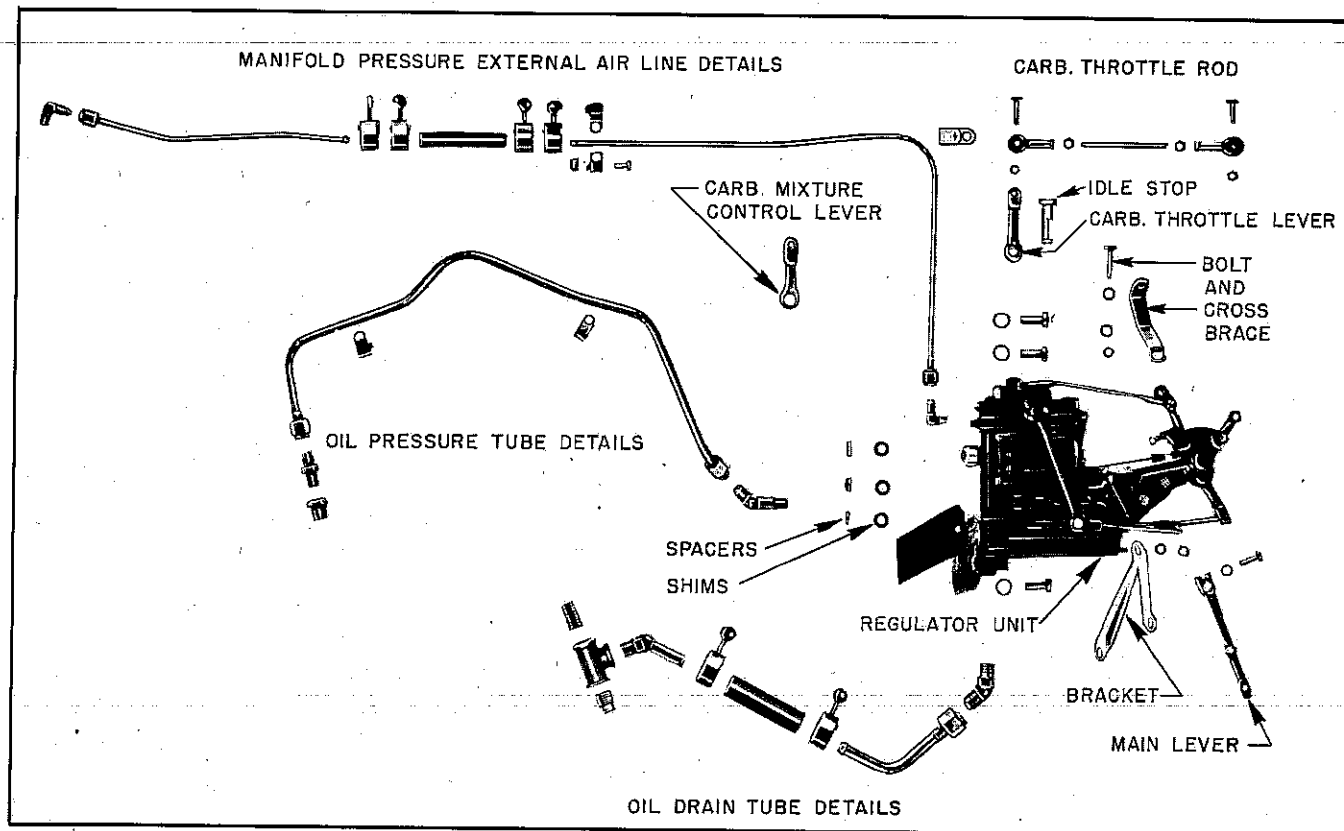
Automatic Manifold Pressure Regulator Showing Type I Installation Detail Parts.
